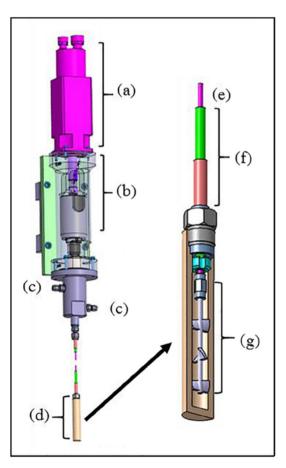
Schematic view of the high-pressure stirred calorimetric cell with a magnetic agitator coupling: (a) agitating motor; (b) magnetic coupling; (c) gas inlet/outlet; (d) measurement cell; (e) agitator shaft; (f) high pressure tubes; (g) agitator.
